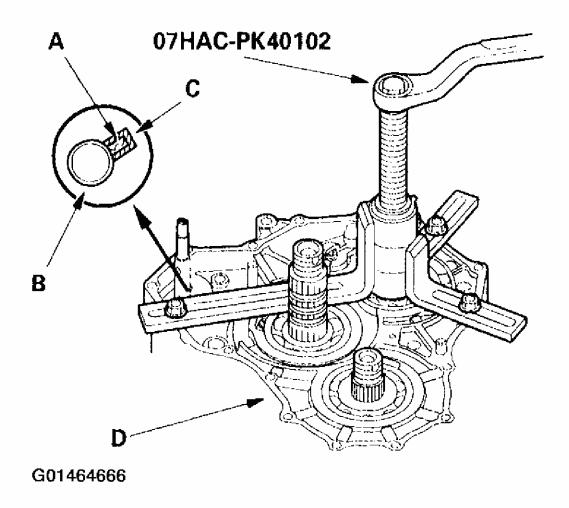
Aligning The Spring Pin On The Control Shaft With The Transmission Housing Groove
